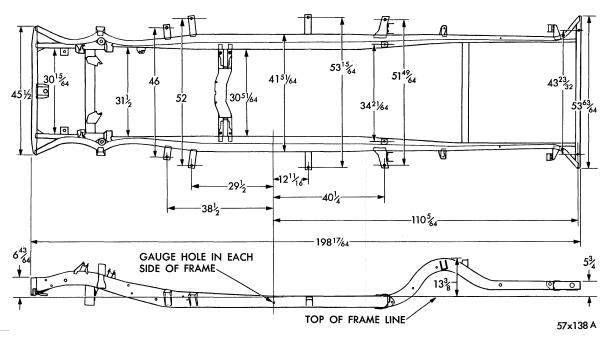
Frame Dimensions Saratoga and New Yorker
